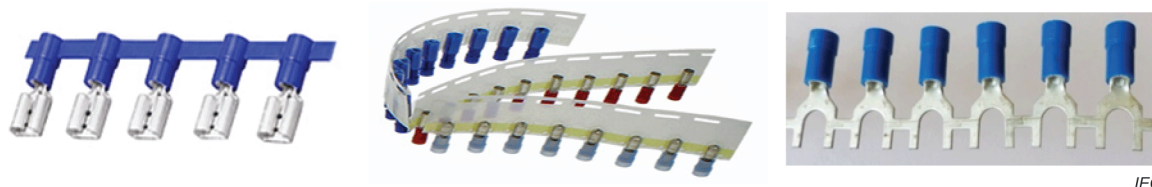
Examples of pre-insulated crimp cable lugs as strip parts
